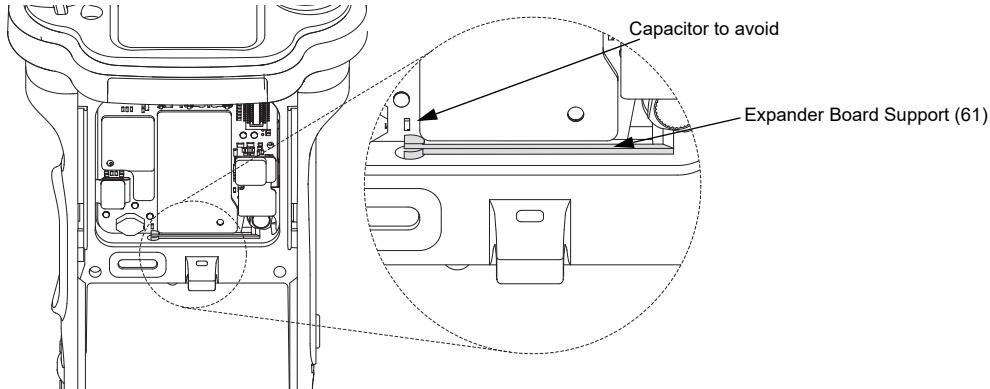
Pull Expander Board Support (Opt. Expansion Board)
